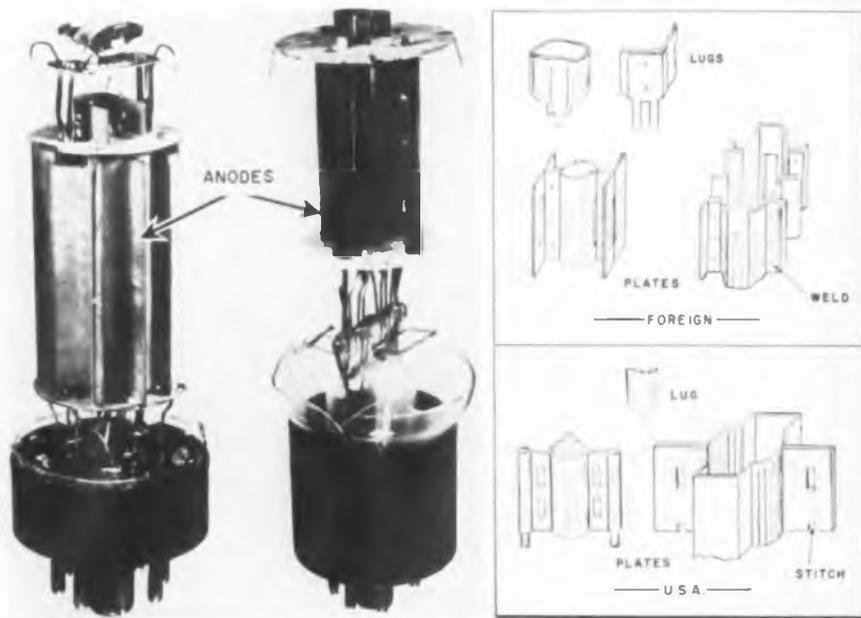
(l) Aluminized iron plate on imported 6L6 (r). Fig. 10 (r) Simple plate designs cut tooling costs
